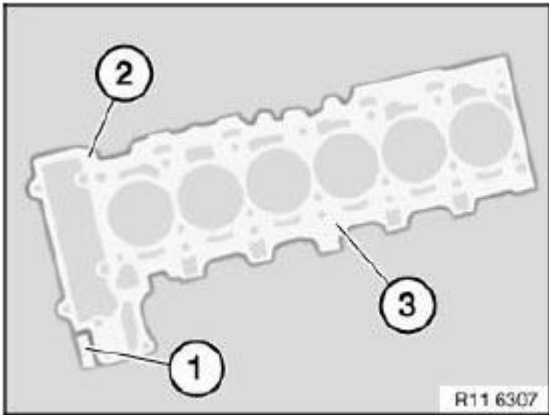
Identifying Rubber Coating On Cylinder Head Gasket
